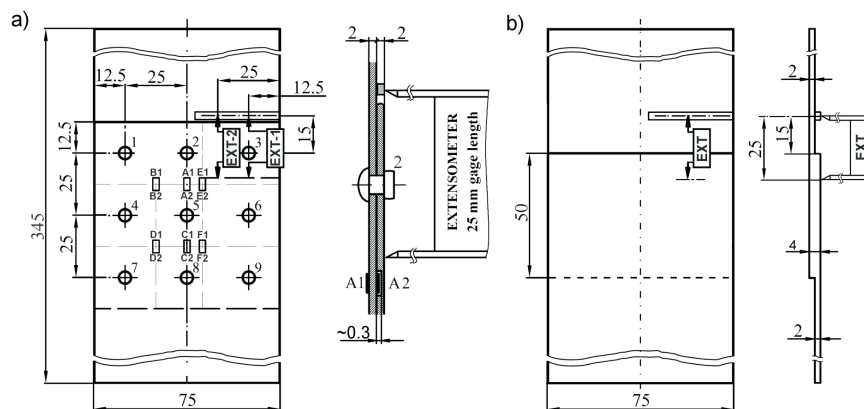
Specimens for rivet flexibility and load transfer measurements: (a) riveted specimen; (b) dummy specimen
